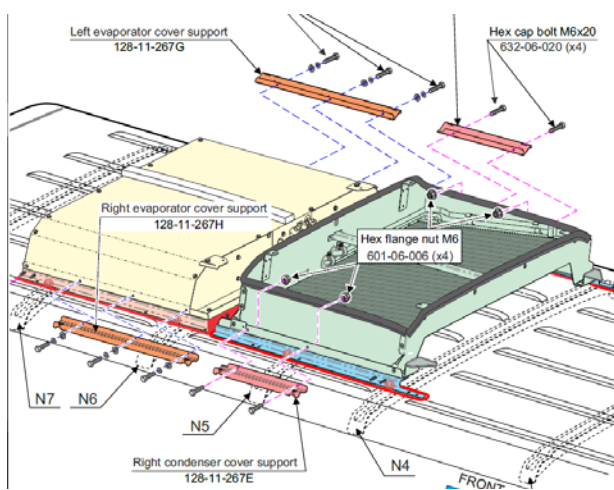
Installation of AC 4000 on Crafter roof in 2 modules
